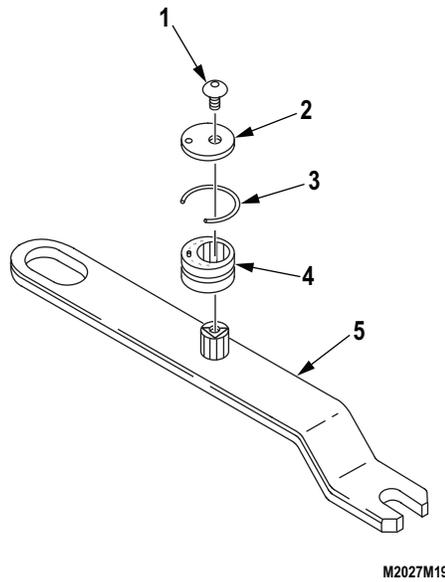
Secondary Drive Lever Assembly (Fixed or Adjustable) Disassembly.
